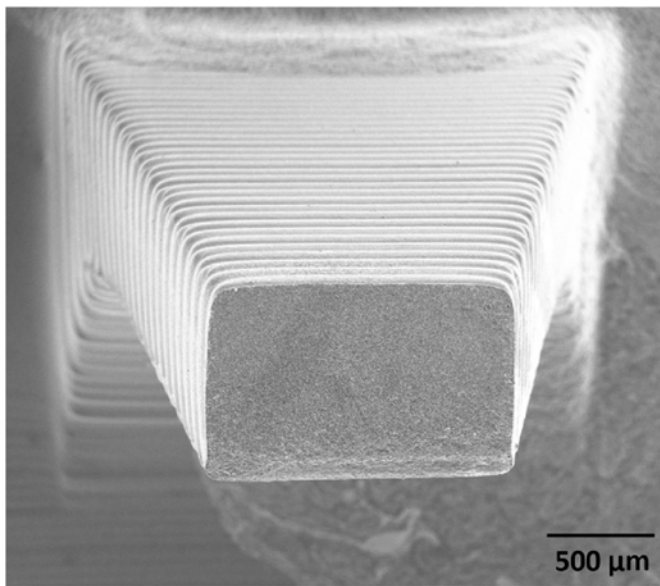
Fracture surface of a sintered cantilever of specimen type B1. Note that the observed cross-section deviates significantly from the assumed rectangular cross-section.
